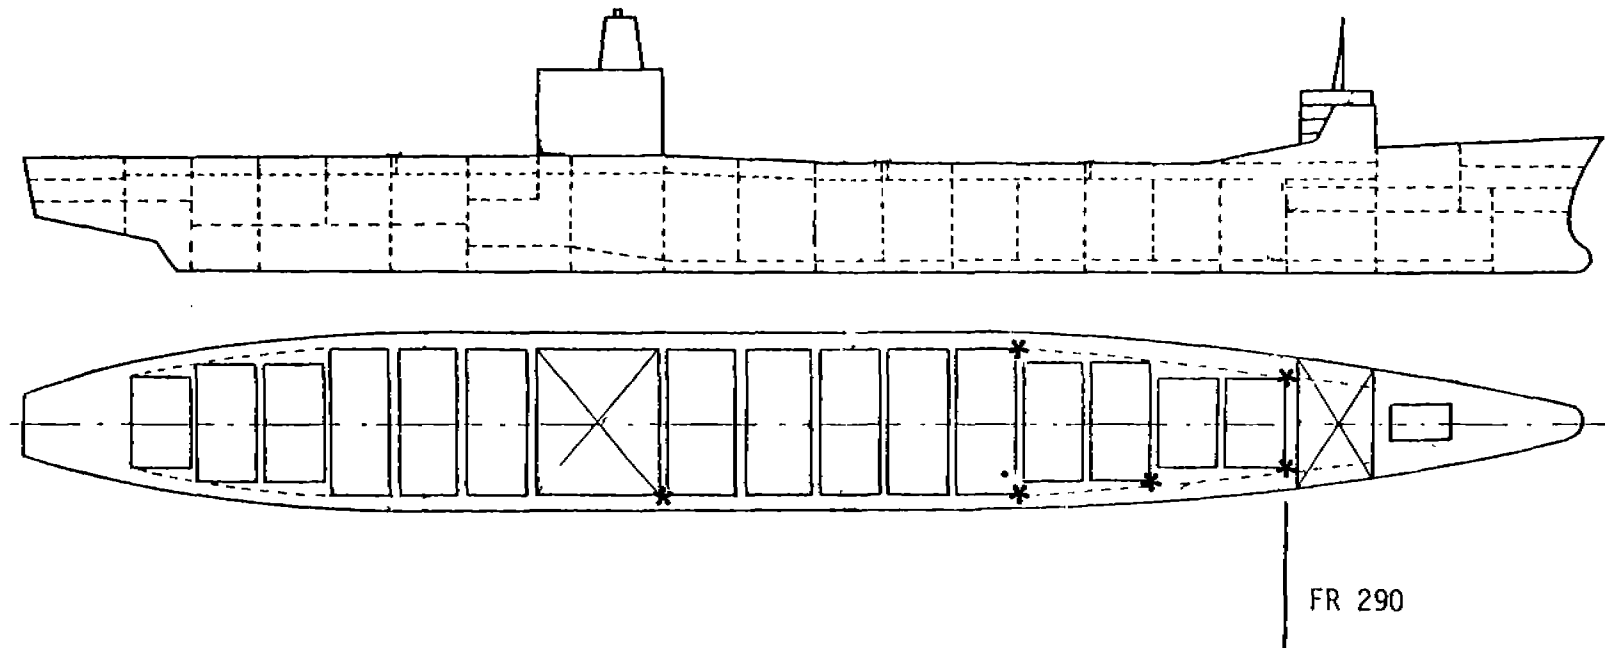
Elevation and deck lay out of the SL7 class of containerships showing frame locations of fractured hatch cut out where fatigue cracking occurred. Other locations where cracks were reported are indicated by *.
